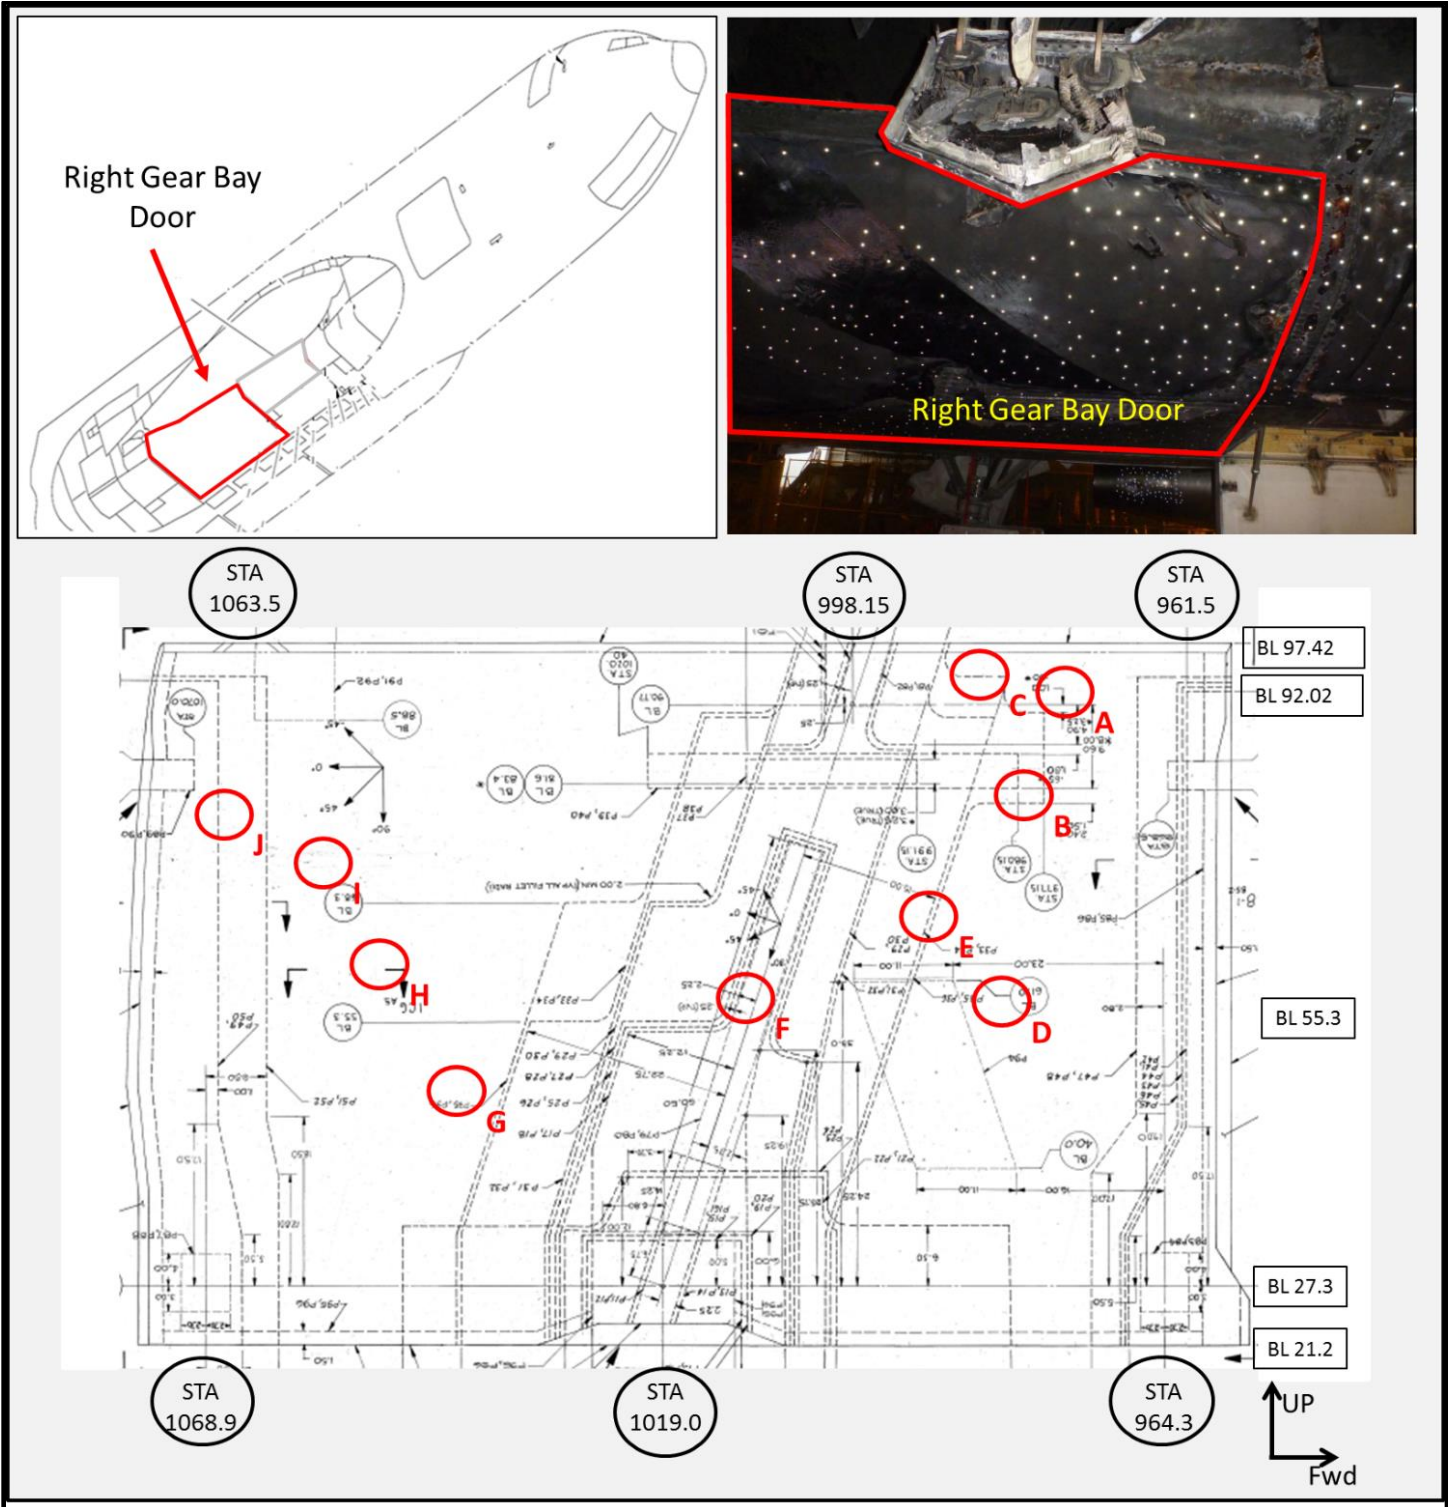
Photograph showing the piece of engine FOD embedded in right gear bay door
